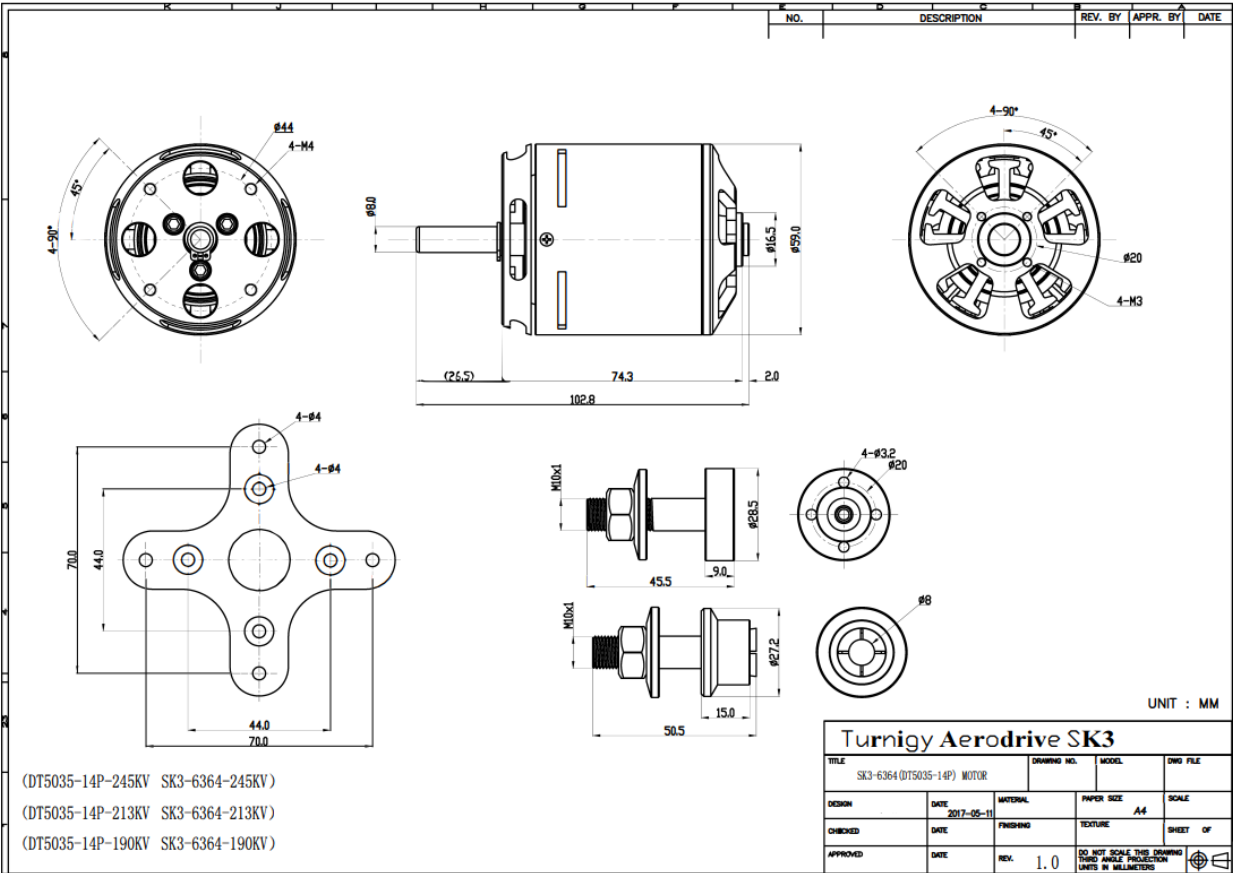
Dimensions of SK3 - 6364-190KV brushless motor including bearings [1]
